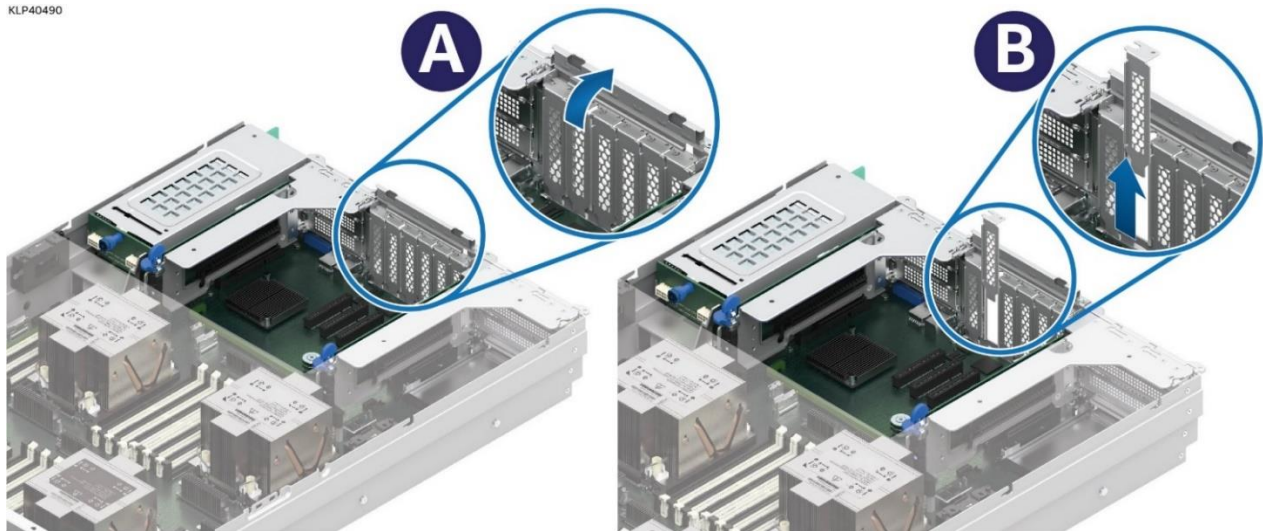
Add-in Card to Server Board - Filler Plate Removal
